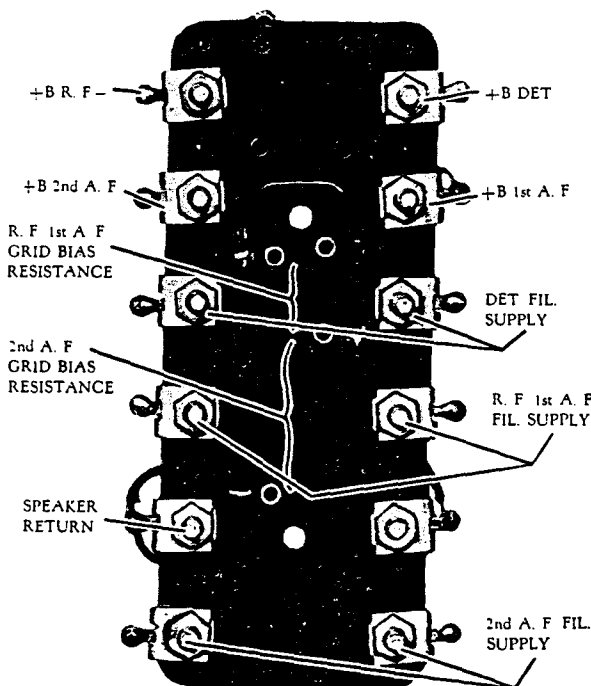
TOP VIEW OF PANEL ASSEMBLY USED IN POWER UNIT OF MODELS 40, 42, 44 AND 52
